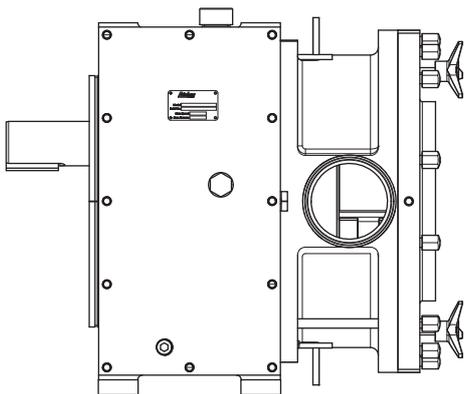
Incomplete machine: pump without motor, coupling, or base frame
